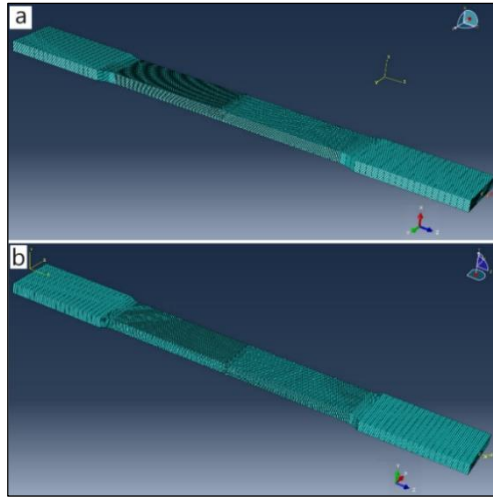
Meshing of tensile test model sample into hexahedral elements for (a) V-shaped groove and (b) double V-shaped groove welding
